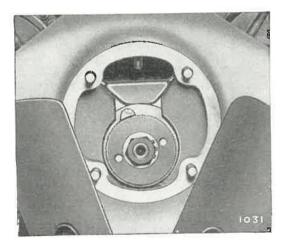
The servated plate for adjustment of the top timing chain is accessible after removal of the engine breather housing.
